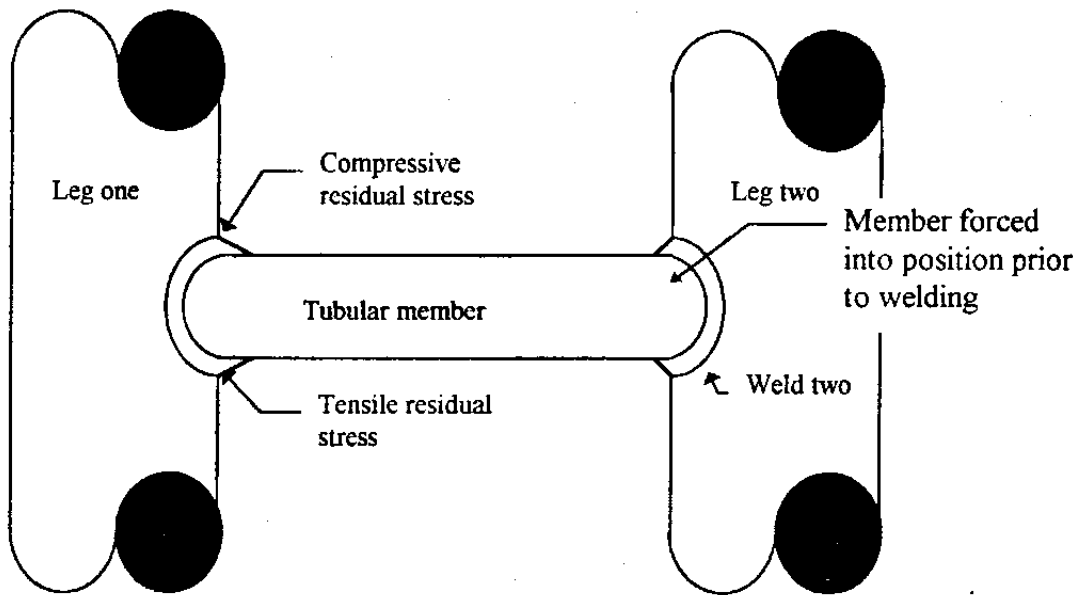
Residual Stress in a Tubular Member After Welding is Complete
